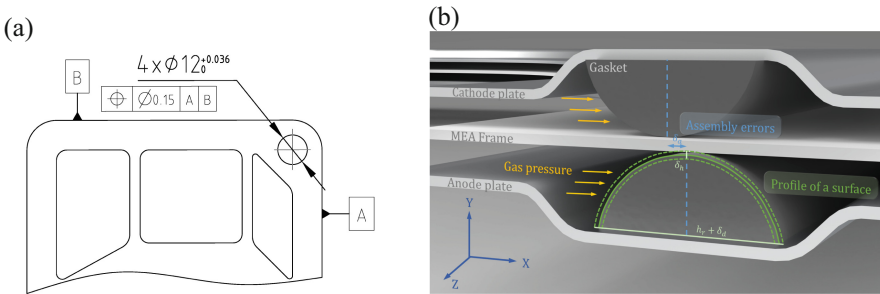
Tolerance analysis diagram: (a) bipolar plate assembly hole tolerance and (b) misalignment and profile errors of sealing gasket surface.
